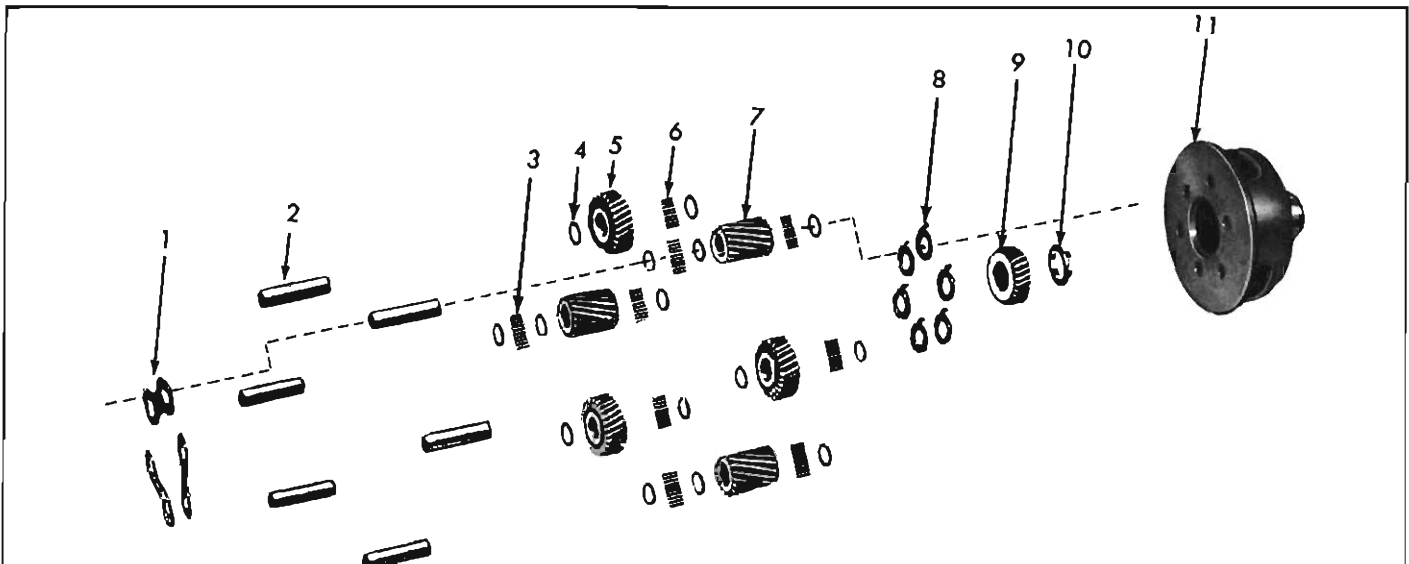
E-2—Planet Carrier Assembly—Exploded View
